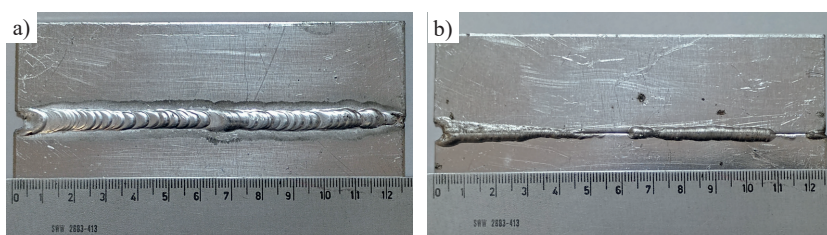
Butt joint of 2 mm thick sheets using the MIG method: a) weld face; b) weld root
